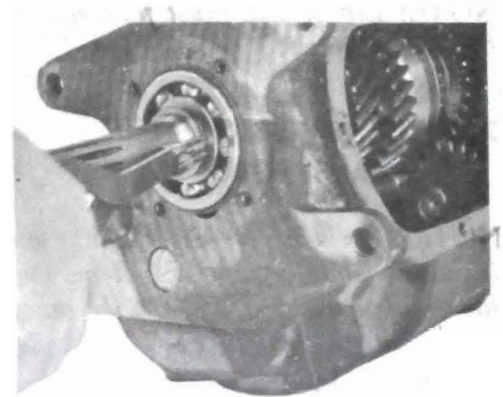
Installing Clutch Drive Gear Bearing Into Case
